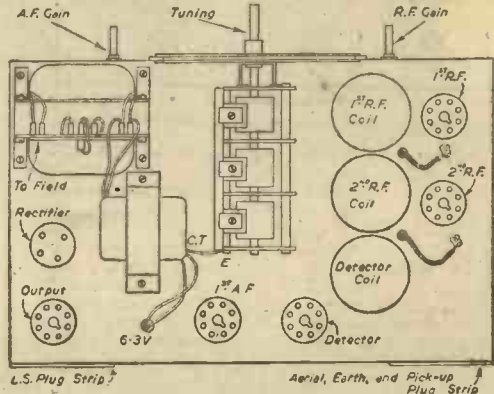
Plan view of the chassis showing additional 6.30. transformer.
